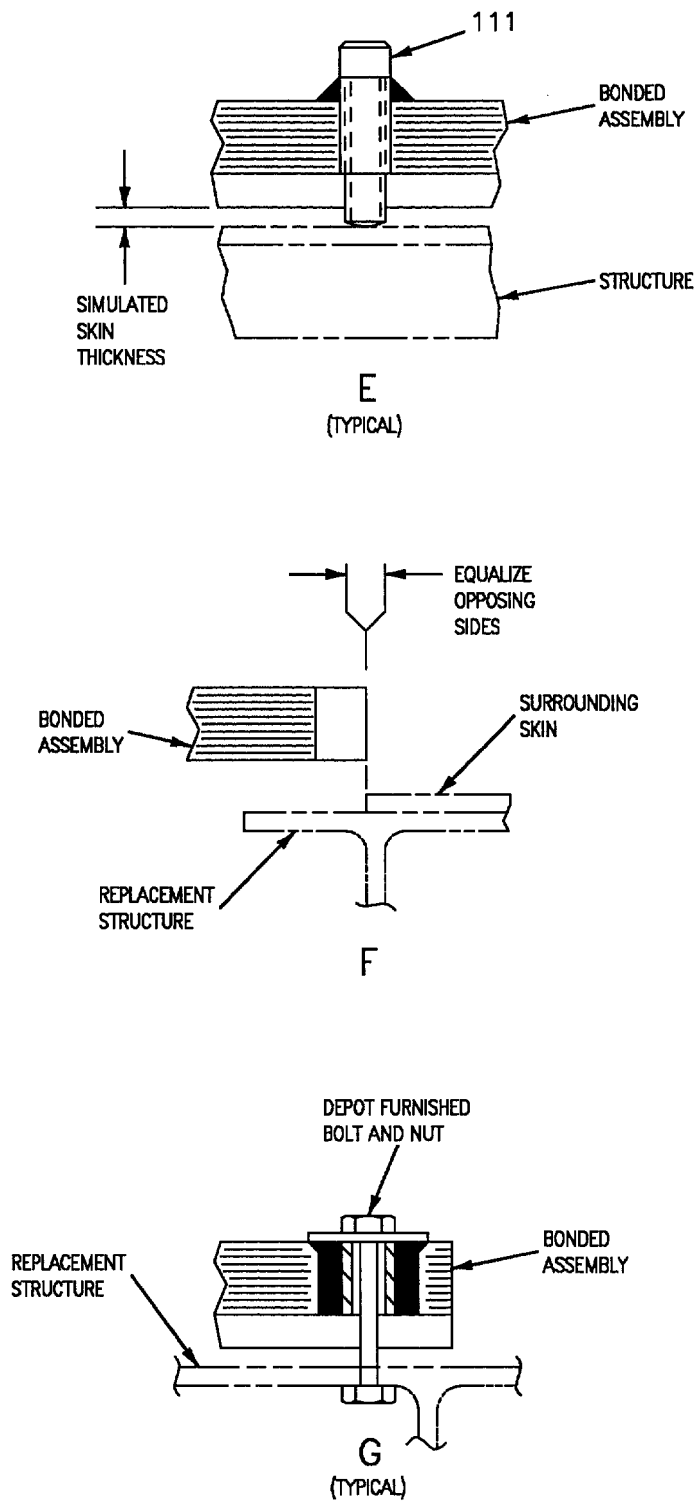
Installation of Plate Set for Drilling Substructure (Sheet 4)
